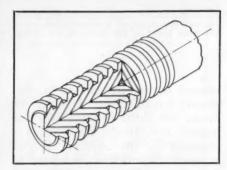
This sketch shows a circular rack on which the teeth have been cut all around by means of a thread miller, geared for no lead.
